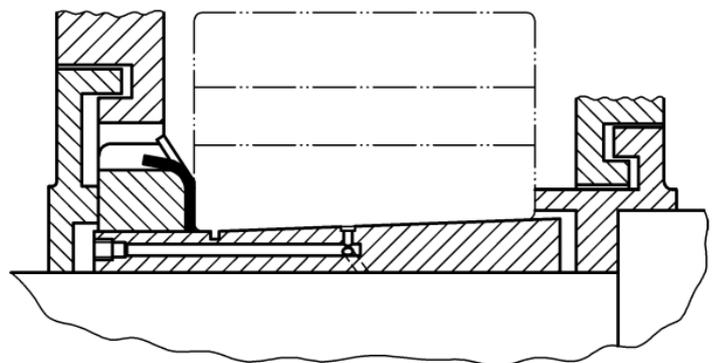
ADAPTER SLEEVE WITH TWO SUPPLY DUCTS FOR OIL INJECTION; SUFFIX: HB
